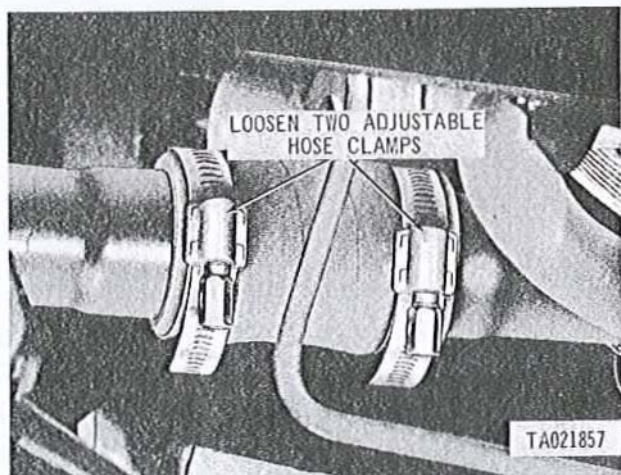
Loosening or tightening oil filler upper and lower tube hose connection, model AVDS-1790-2C and AVDS-1790-2D engines.
